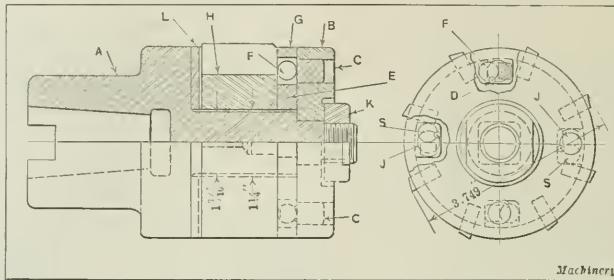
Floating Reamer for reaming Automobile Engine Cylinders
